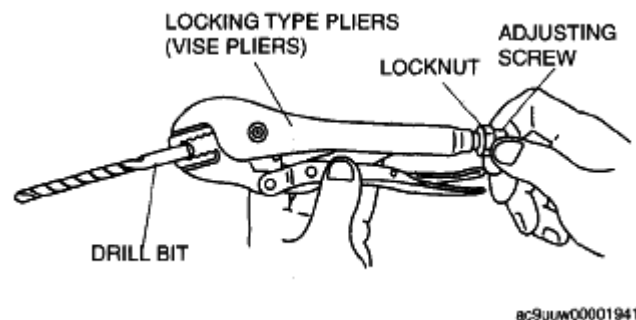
Identifying Jaws Of Locking-Type Pliers
